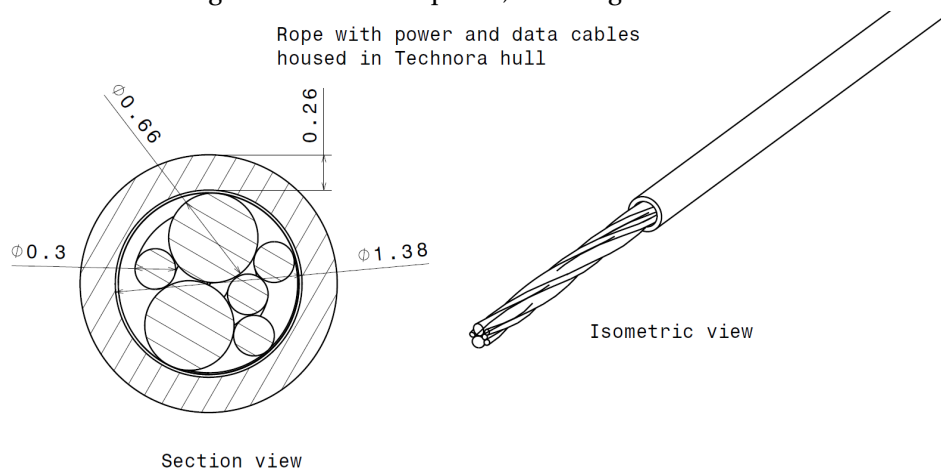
Technical drawing of the rope housing 2 power and 4 data cables inside a Technora hull.
